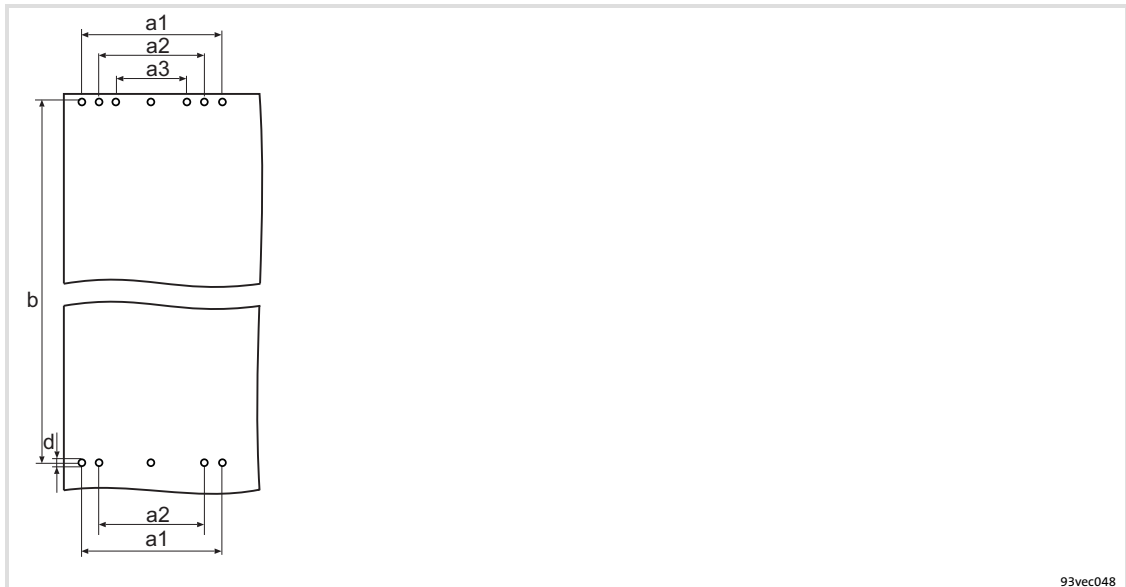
Bore holes in the mounting plate for fixing the controller
